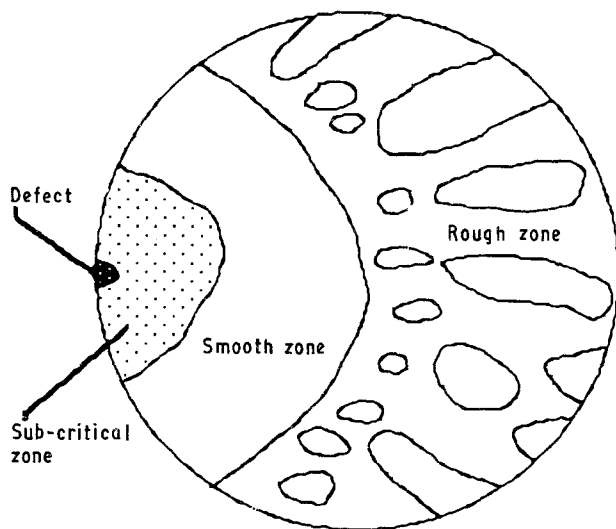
Schematic diagram of a typical fracture surface of a silica-filled epoxy tensile specimen. Fracture may initiate at a defect followed by a sub-critical zone where particles are debonded. The crack accelerates in the smooth zone and reaches limiting velocity in the rough zone.
